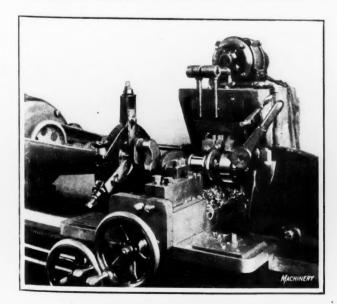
Tooling Equipment used for machining the Rear Bearing, Flange, Oil-groove and Oil-throw Ring
